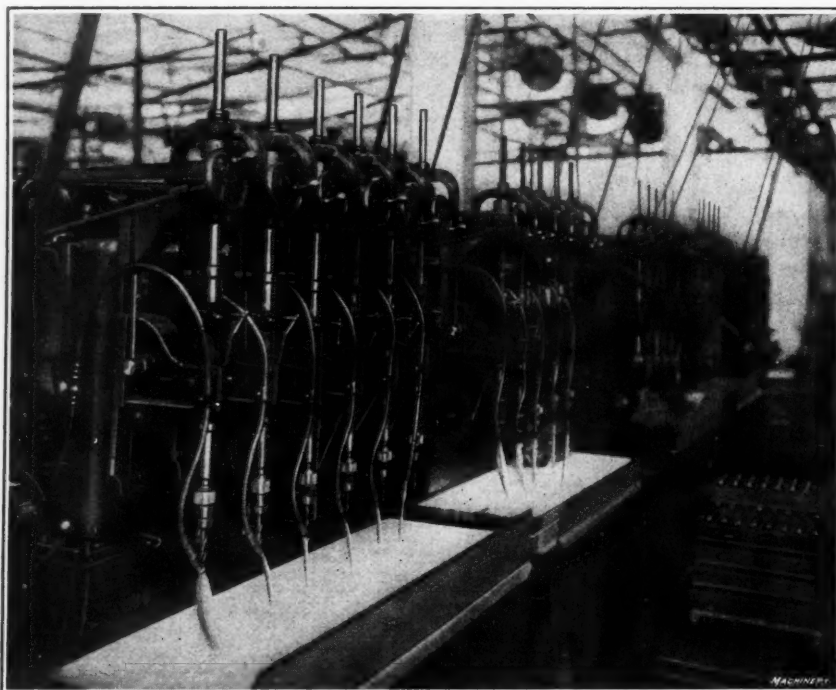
Multiple-spindle Drill Presses with Flexible Tubes for delivering Cutting Compound to Tools
